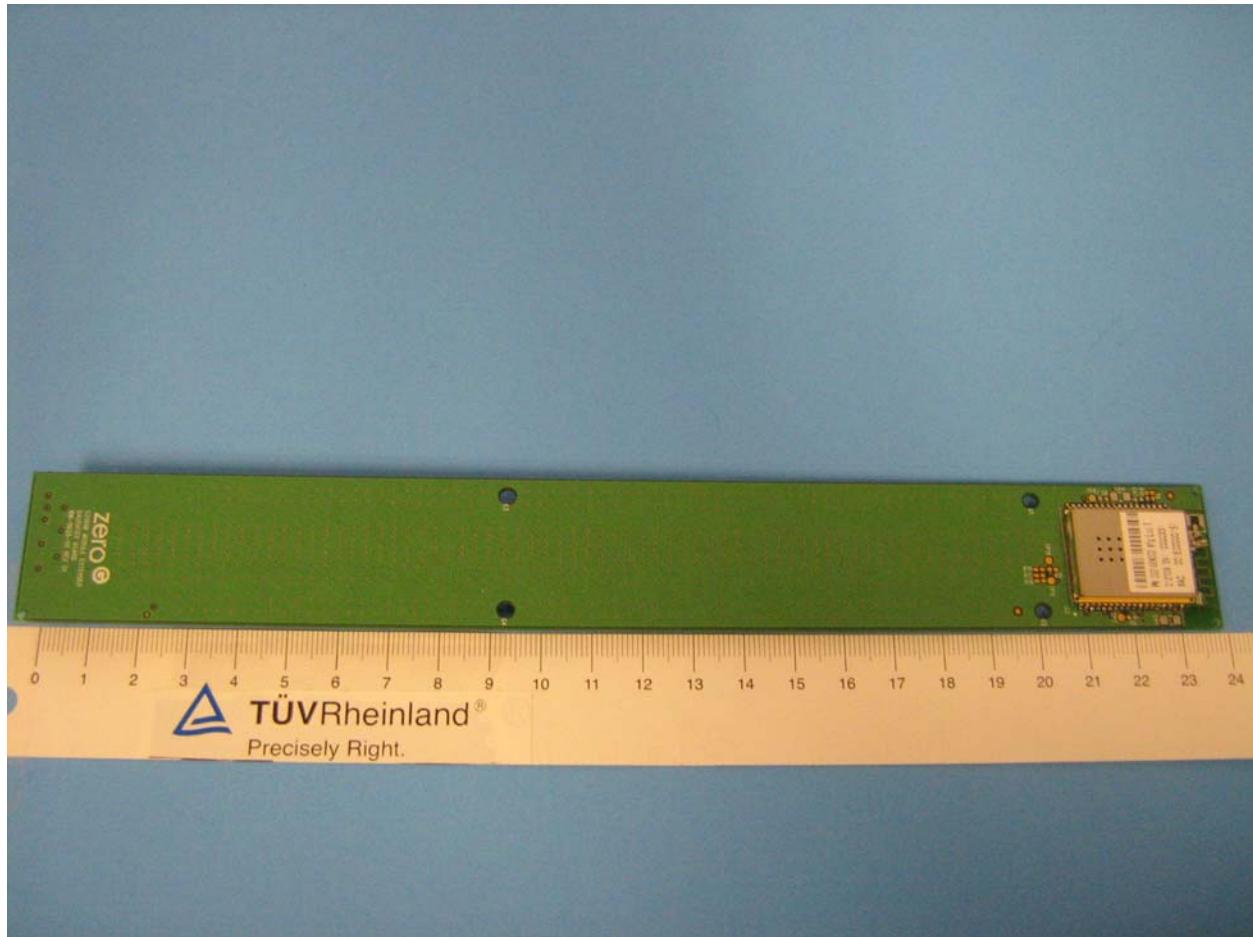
Internal photo of ZG2101 – Soldered Side
